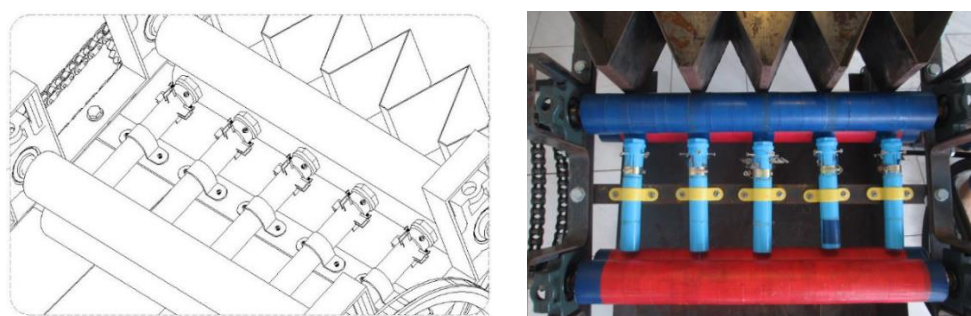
Two pairs of rollers at the inlet and outlet of a pipe containing a blade assembly
